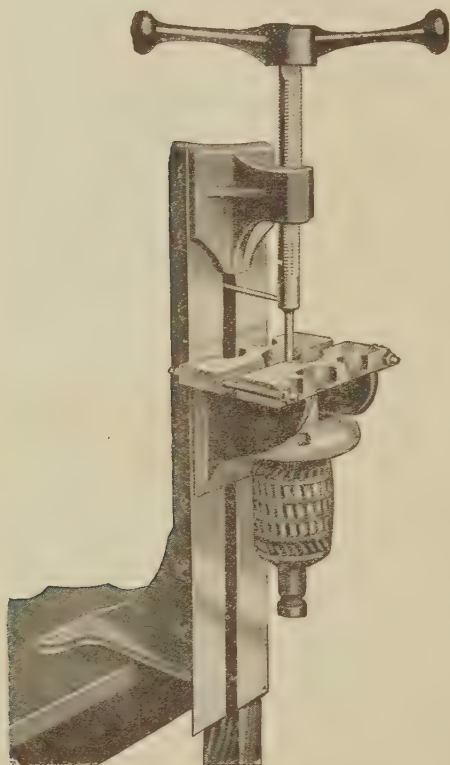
The "Puller Press." (Autocar Electrical Equipment Co., Ltd.)
